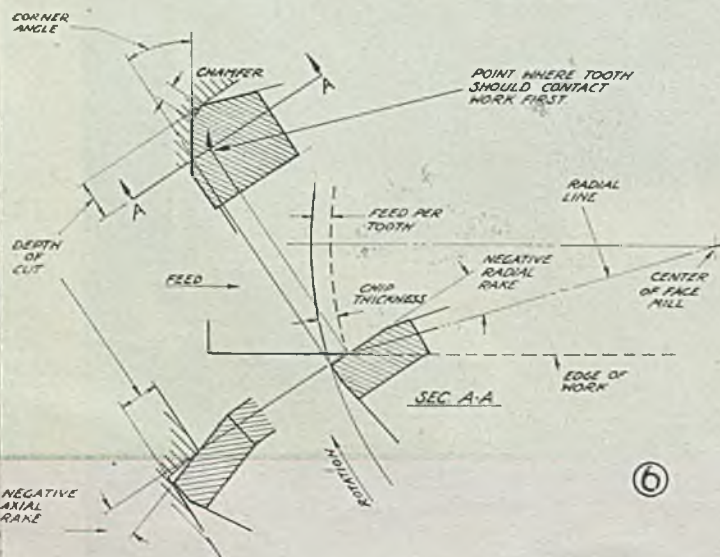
Negative engagement angle was obtained between the cutting edge and the work, in both axial and radial directions
